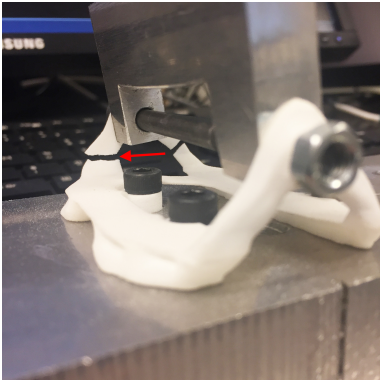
Test 2 fracture. Crack initiation where the red arrow points.
